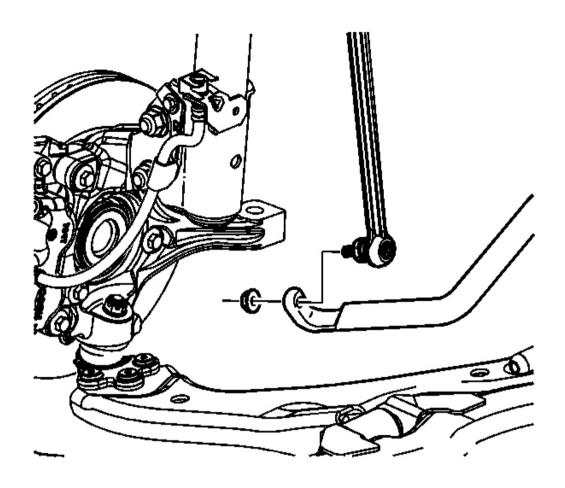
Lower Stabilizer Bar Links & Bolts Courtesy of GENERAL MOTORS CORP.
